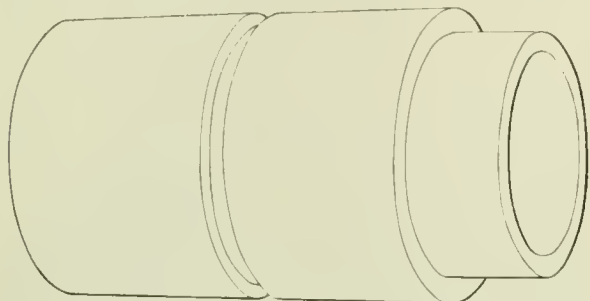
New Safe End With Tube Shrunk on, Ready for Welding
